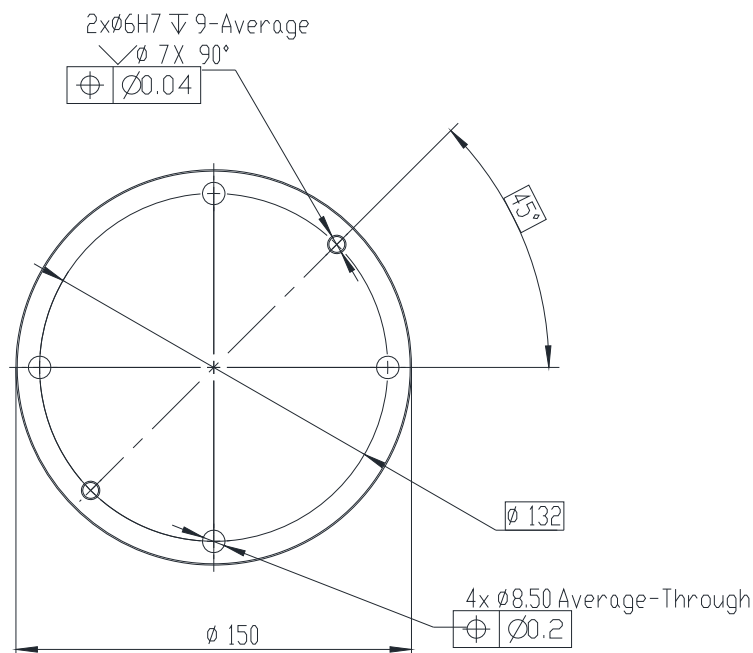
Dimensions of installation holes on the base, with unit of mm
